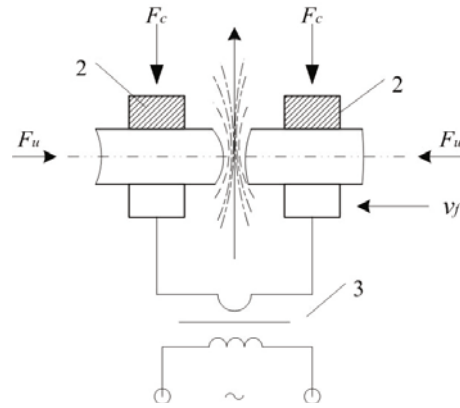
the schematic diagram of Flash butt welding process: 1- samples, 2-clamp electrodes, 3-resistance welding transformer,  $F_c$ -clamping force,  $F_u$ -upset force,  $V_f$  flash velocity
